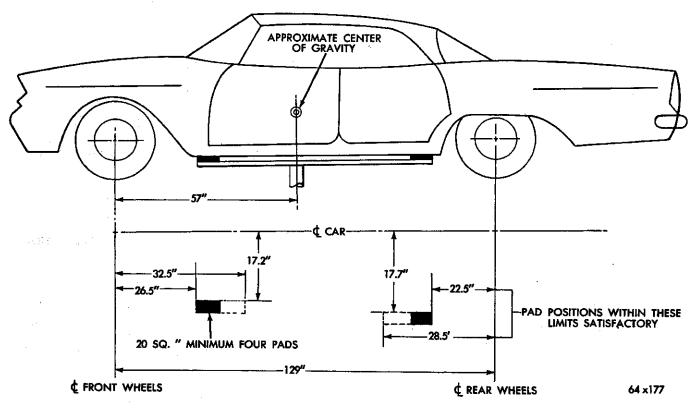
Support Location for Frame Contact Hoisting (Imperial)
